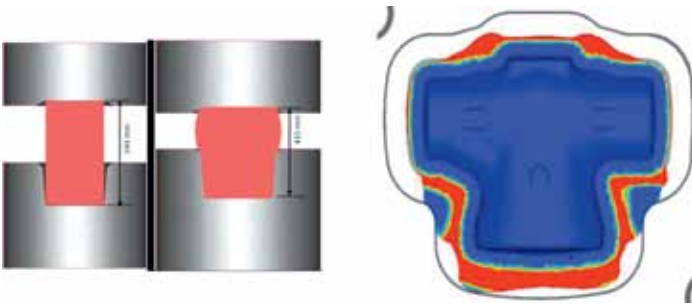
Upset Forging Figure 12b : Finisher Forging
